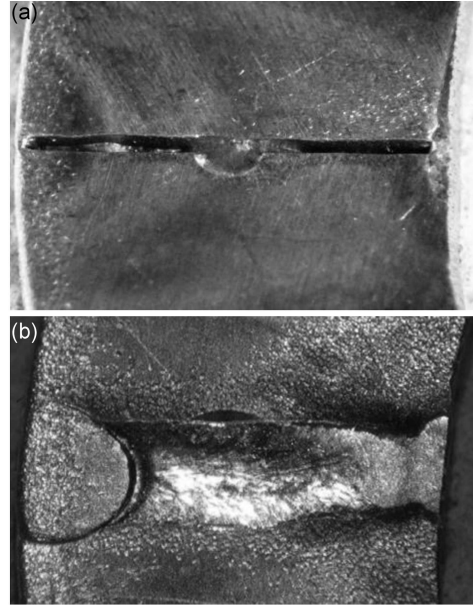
Close-up view: (a) cut welded from just one side (the half-weld is underneath in this picture, shown here for illustration only), (b) cut re-welded into a full joint (by welding operation completed on both sides of the ring).
